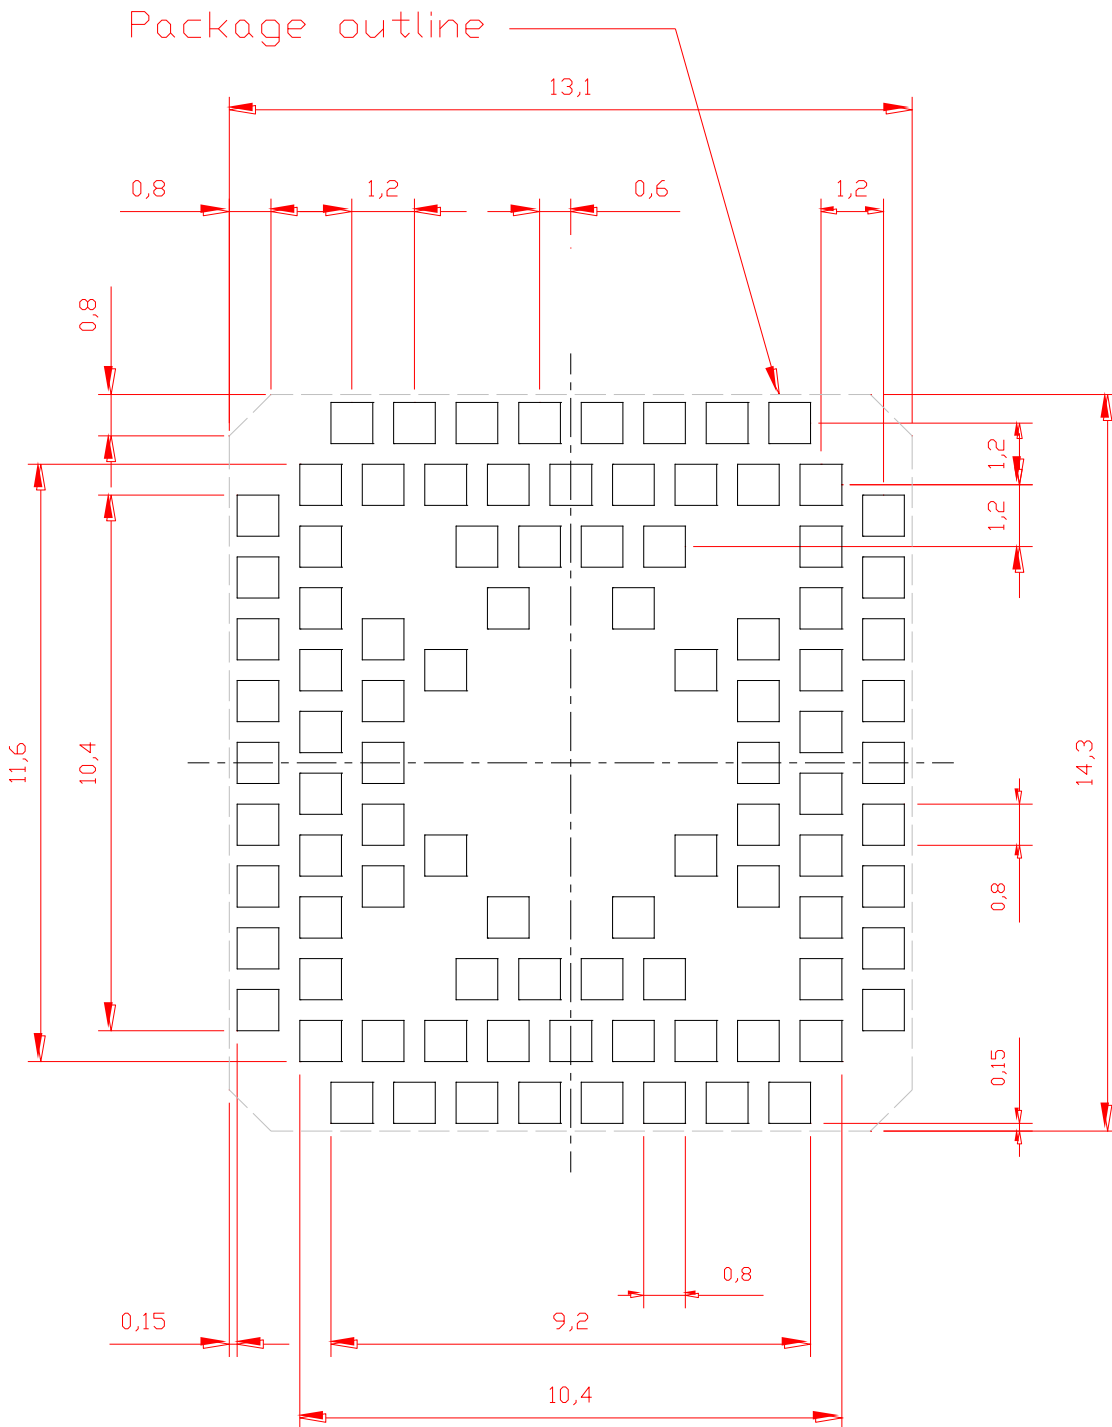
NE310L2-W1 Solder resist pattern (top view)
